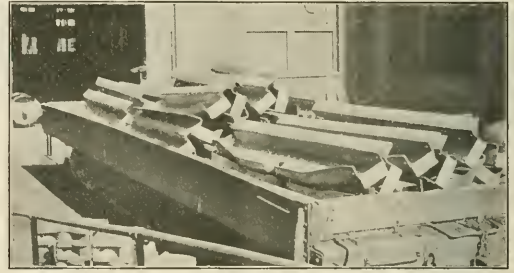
Car of Steel End Sills Leaving Boiler Shop
